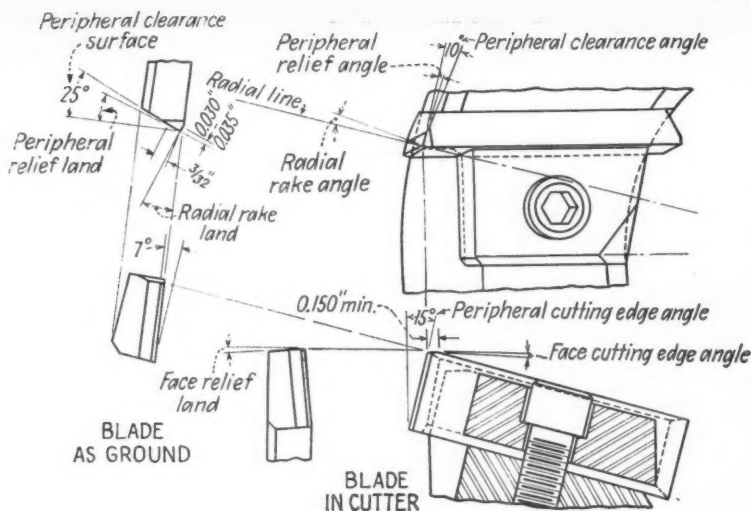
Designation and location of the various cutting and clearance angles to be considered in grinding milling cutters for maximum life and performance.
